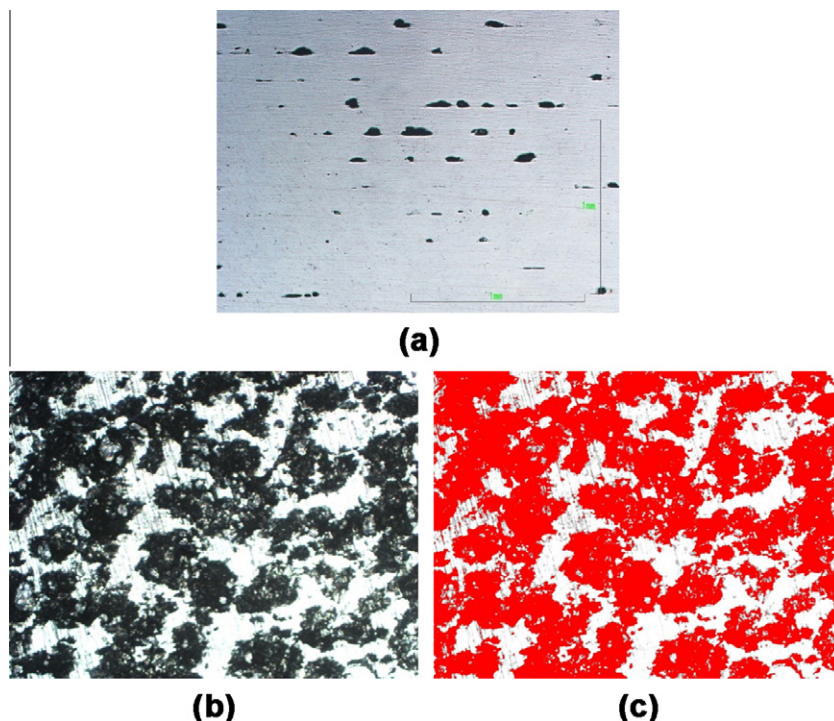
(a) Cross-section of UAM build. (b) UAM fracture surface. (c) Image threshold measurement of UAM fracture surface using Fiji imaging software.
